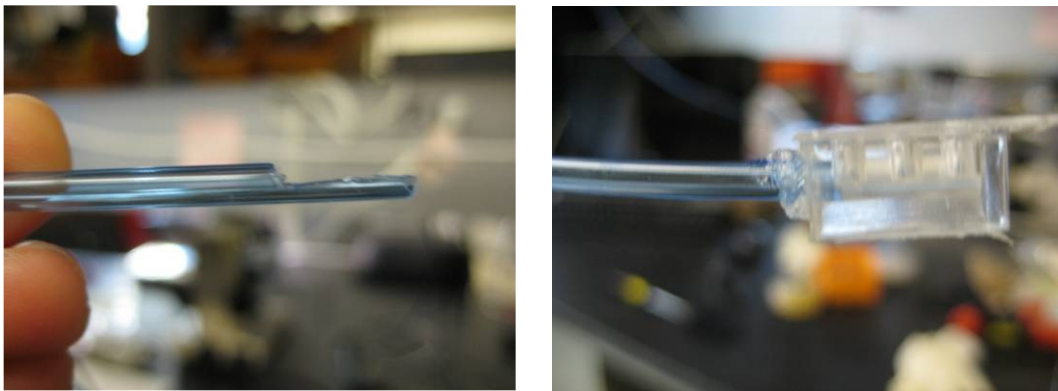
The single tube is cut so that it joins easily and supports the actuator substrate
